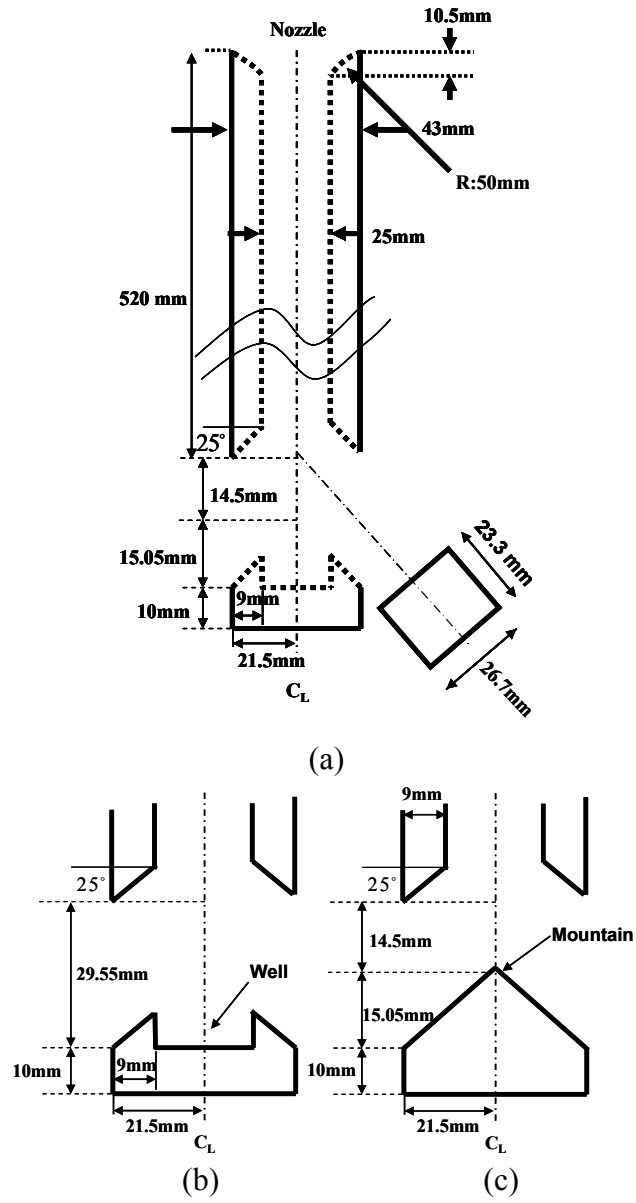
Geometry of (a) nozzle and close-up of: (b) well-bottom and (c) mountain bottom shapes
